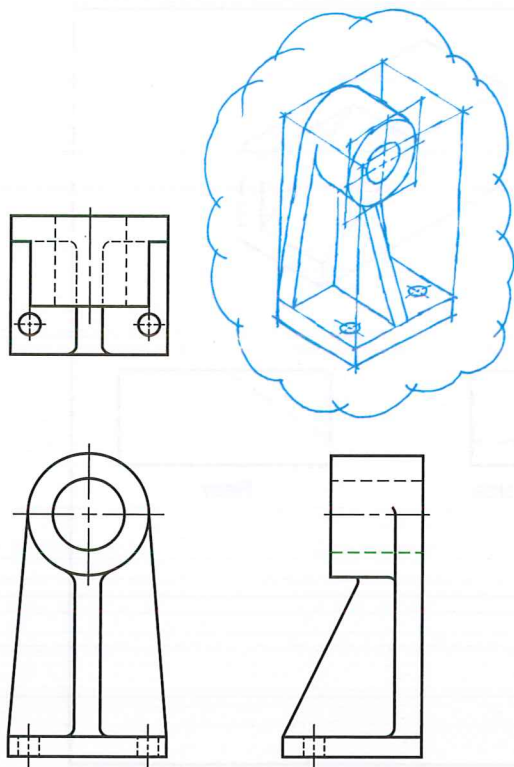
An object in a multiview drawing should be visualized in three dimensions. If the drawing is broken down into basic geometric shapes, it is much easier to visualize the three-dimensional representation of the object.
